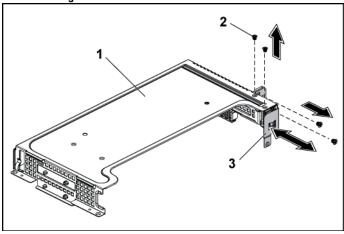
Removing the LSI 9265-8i Card Assembly for 2U Node
